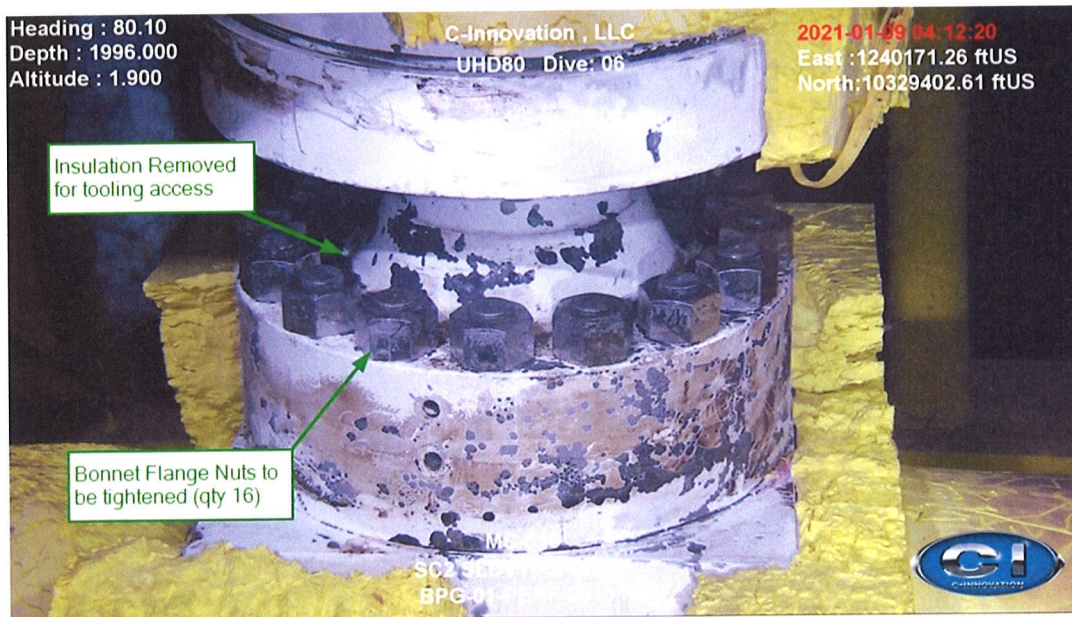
Completed Insulation Removal for Bonnet Bolt Access
